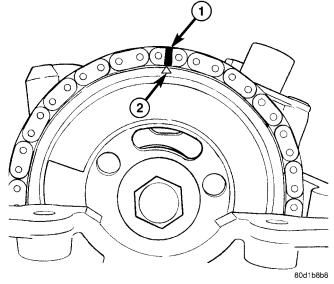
Identify Timing Chain Link for Reassembly Purposes
